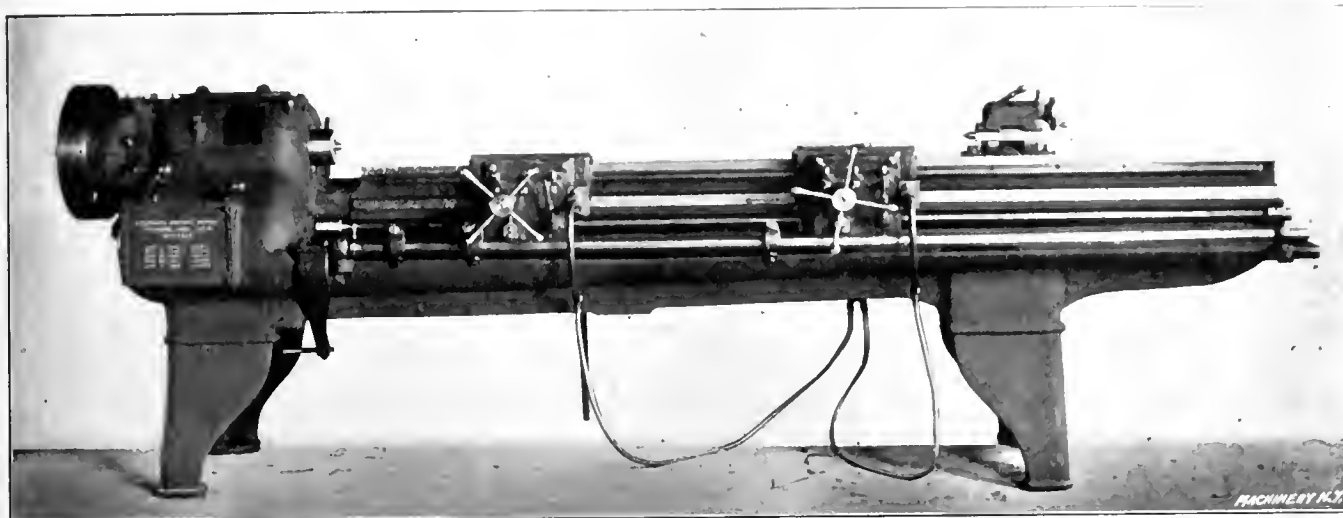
"Lo-Swing" Lathe with Bed extended to increase the capacity of the machine
